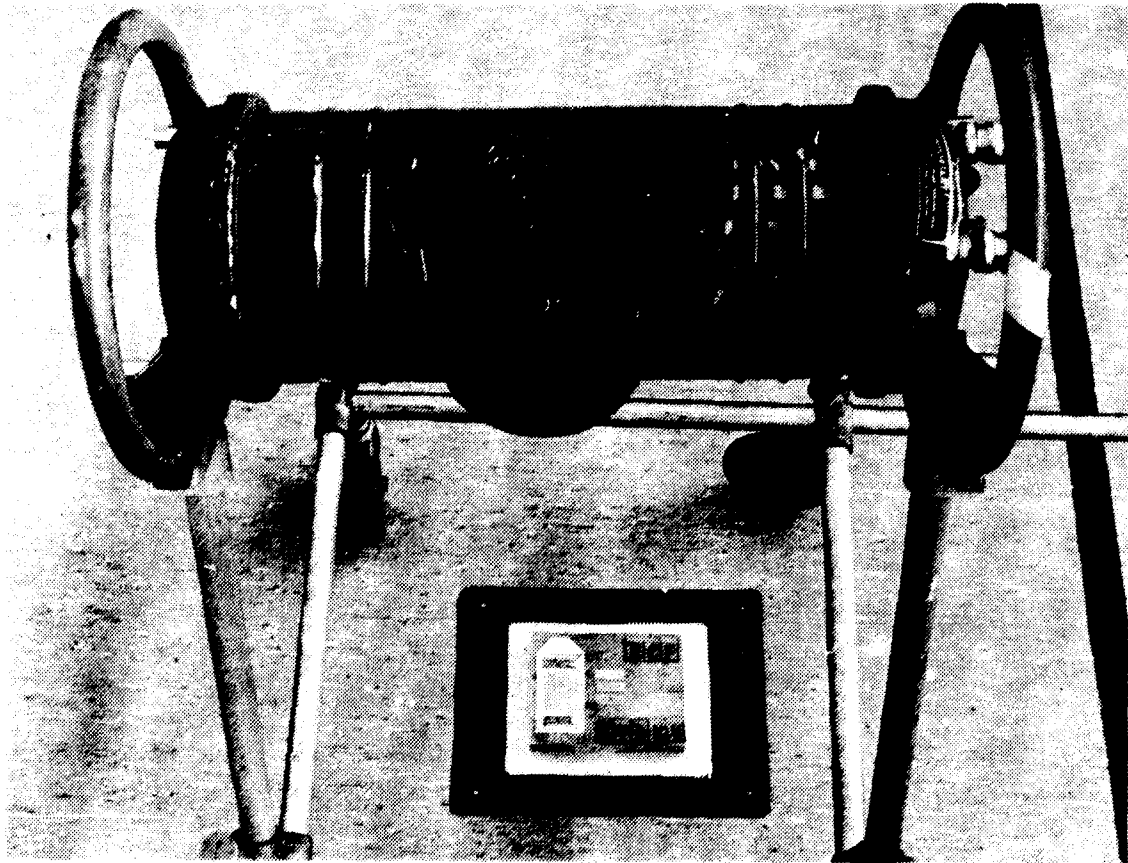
Andrex 180 kV X-ray machine (self-rectified, single-tank) used for radiography of the 30-mm Al plate
